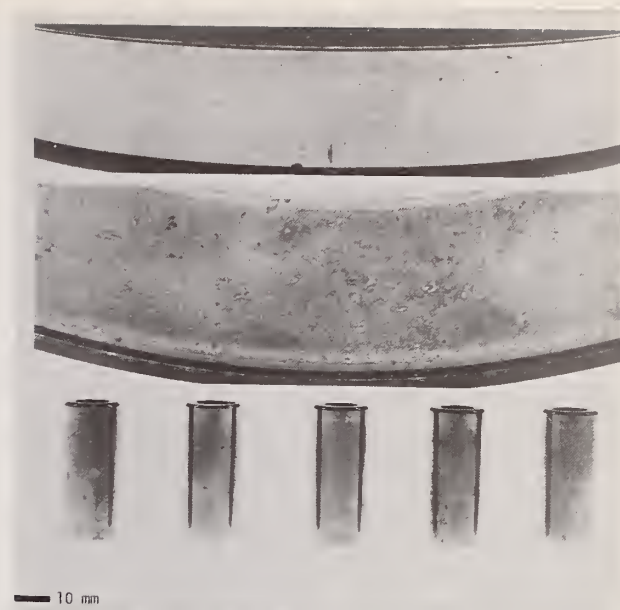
Denting damage to cone, cup and rollers from debris entering the bearing from spalling in another component, through defective seals, or from improperly cleaned housings.
